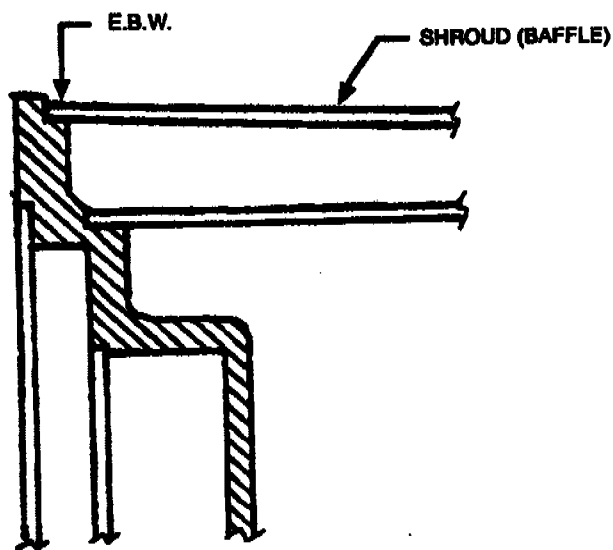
Electron Beam Welding of Baffle onto Bearing Housing.
